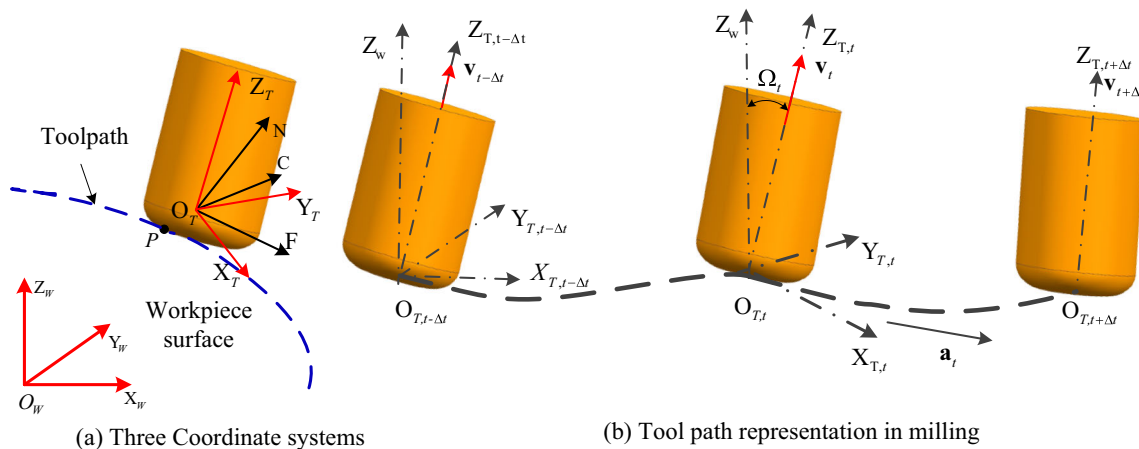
Coordinate systems and tool path representation in 5-axis machining. a Three coordinate systems. b Tool path representation in milling
